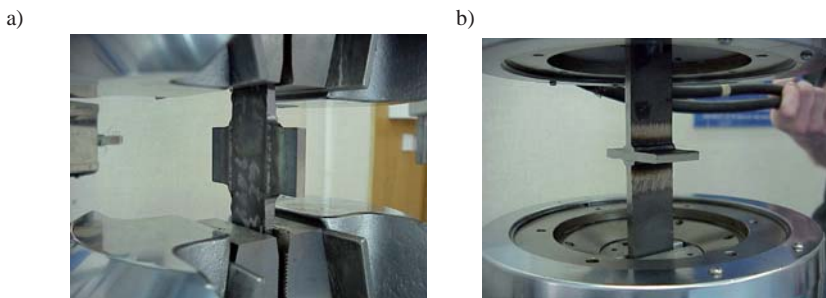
The samples during the fatigue tests: a) with longitudinal welds (type c), b) cross-type sample (type D)
